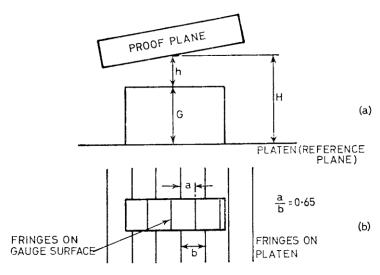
Fringe displacement between gauge and base plate in N.P.L.-type gauge interferometer.
